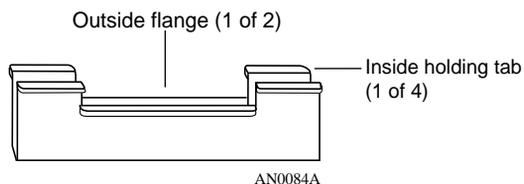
Tabbed Edges and Flanges on Memory Card Protector
